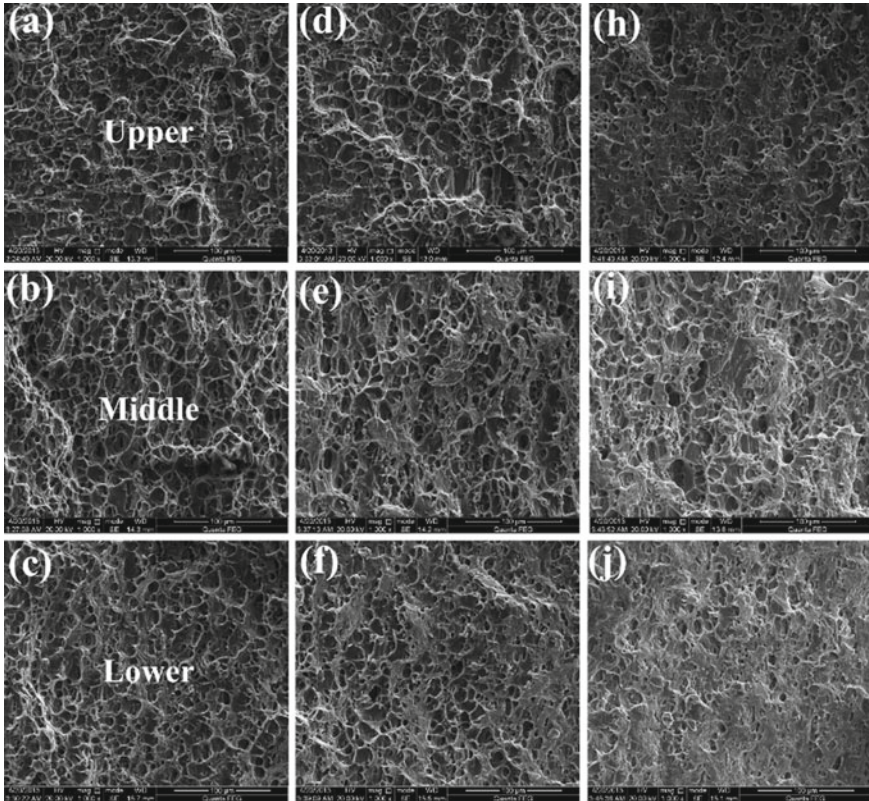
Effect of welding speeds on fracture morphology: a–c 10 mm/min, d–f 50 mm/min, and h–j 200 mm/min [72]
